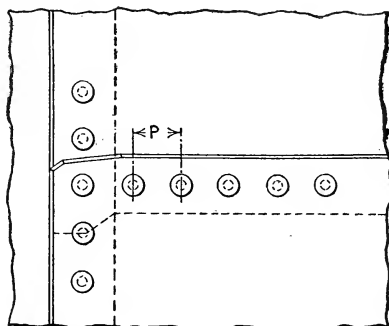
EXAMPLE OF LAP JOINT, LONGITUDINAL OR CIRCUMFERENTIAL, SINGLE-RIVETED
